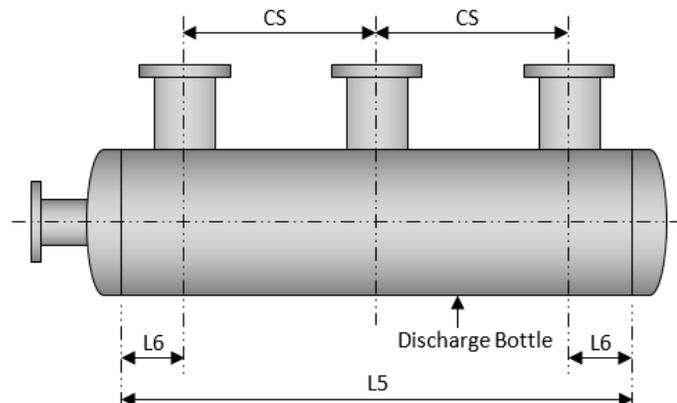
Layout for GPSA three-cylinder, single-bottle sizing.
